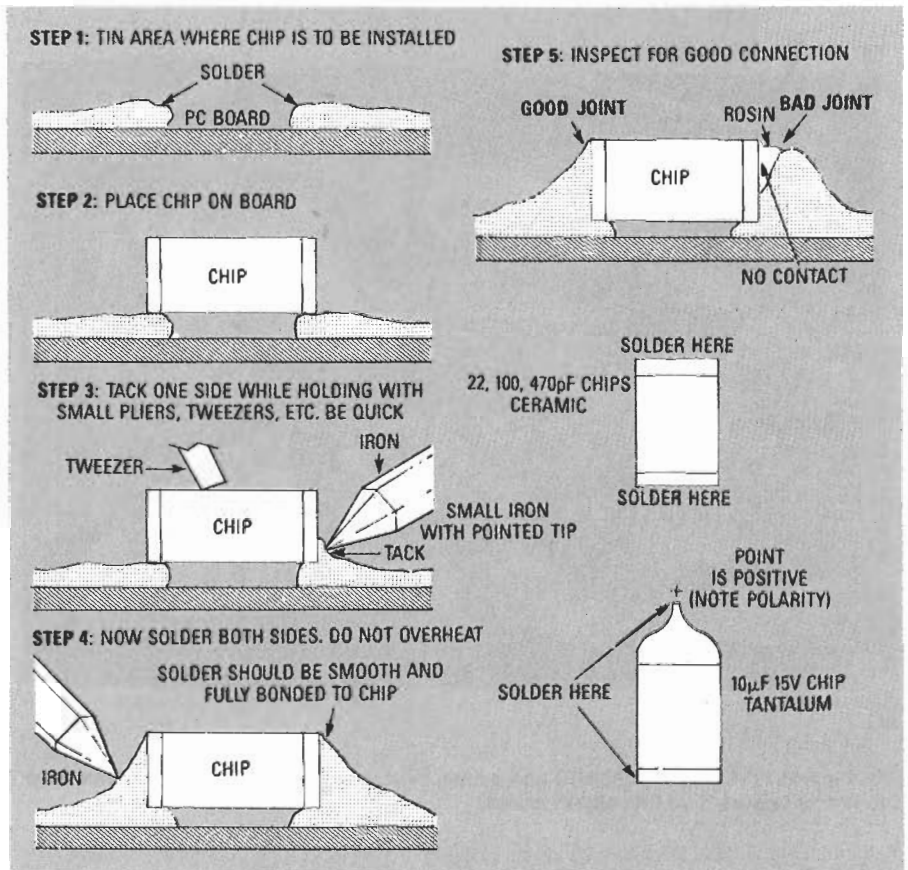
IF YOU FOLLOW THESE STEPS when soldering the chip components to the PC board, you'll have no problems with them.
